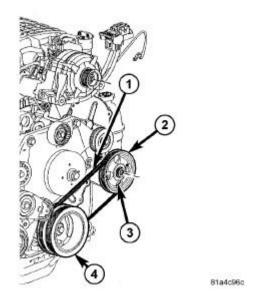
Power Steering Belt Courtesy of CHRYSLER LLC
